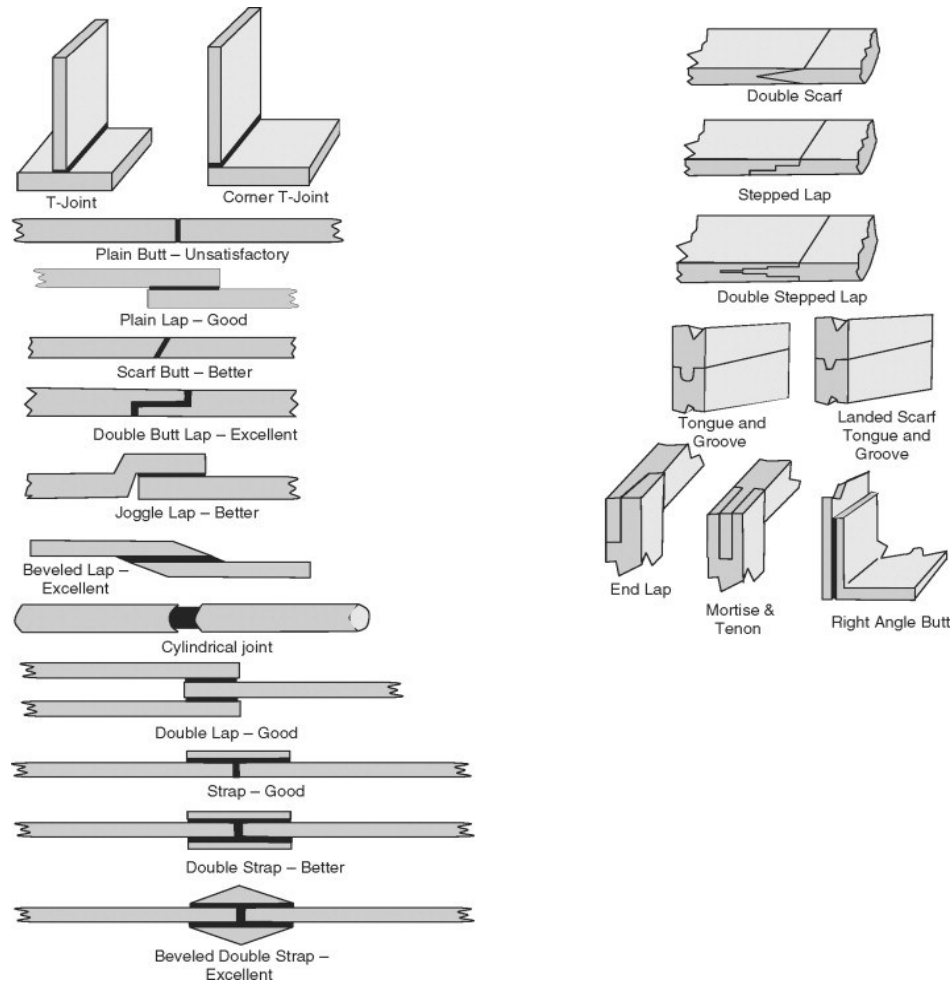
Geometrical shapes of adhesive joint (Troughton, 2008).
